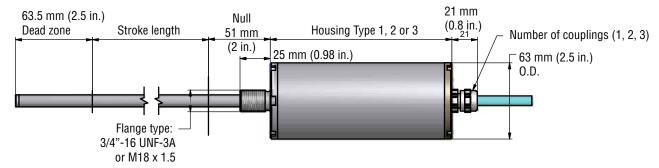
Model RS Rod-style sensor dimension reference. (See Figures 5, 6 and 7 for cable gland exits)
